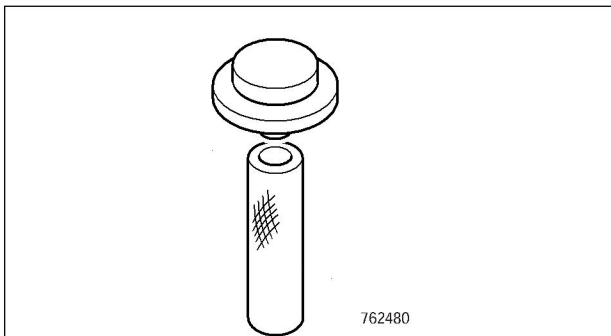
892/01146 Cylinder Block Core Plug Fitting Tool
